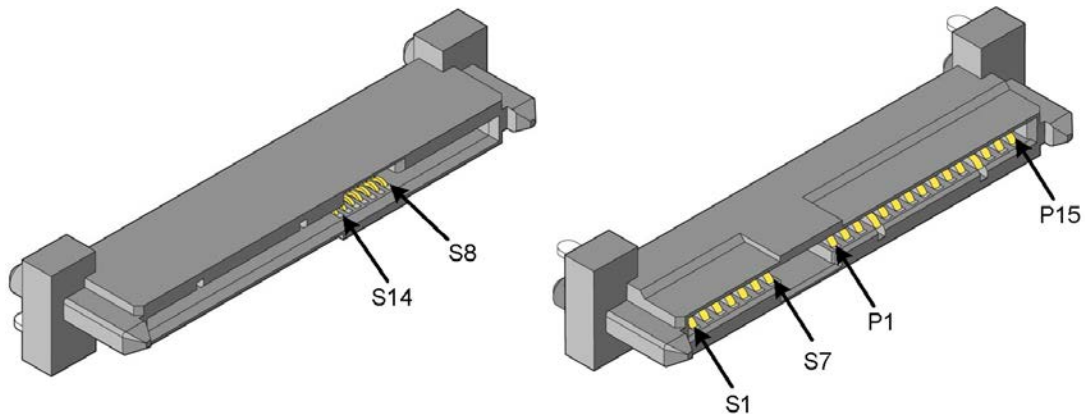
3.5” hard disk drive with Ethernet interface plug connector
